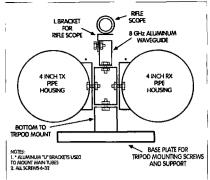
Rear view of mounting method to hold both 4-inch pipes to large rectangular center support and "U" brackets mounting and holding the pipes together. The main center mount was a large section of rectangular waveguide, but any stout aluminum tubing could be used here. Another section is attached to the main bottom tube to form an extension to attach to a tripod base plate, giving clearance for the 4-inch tubes.
